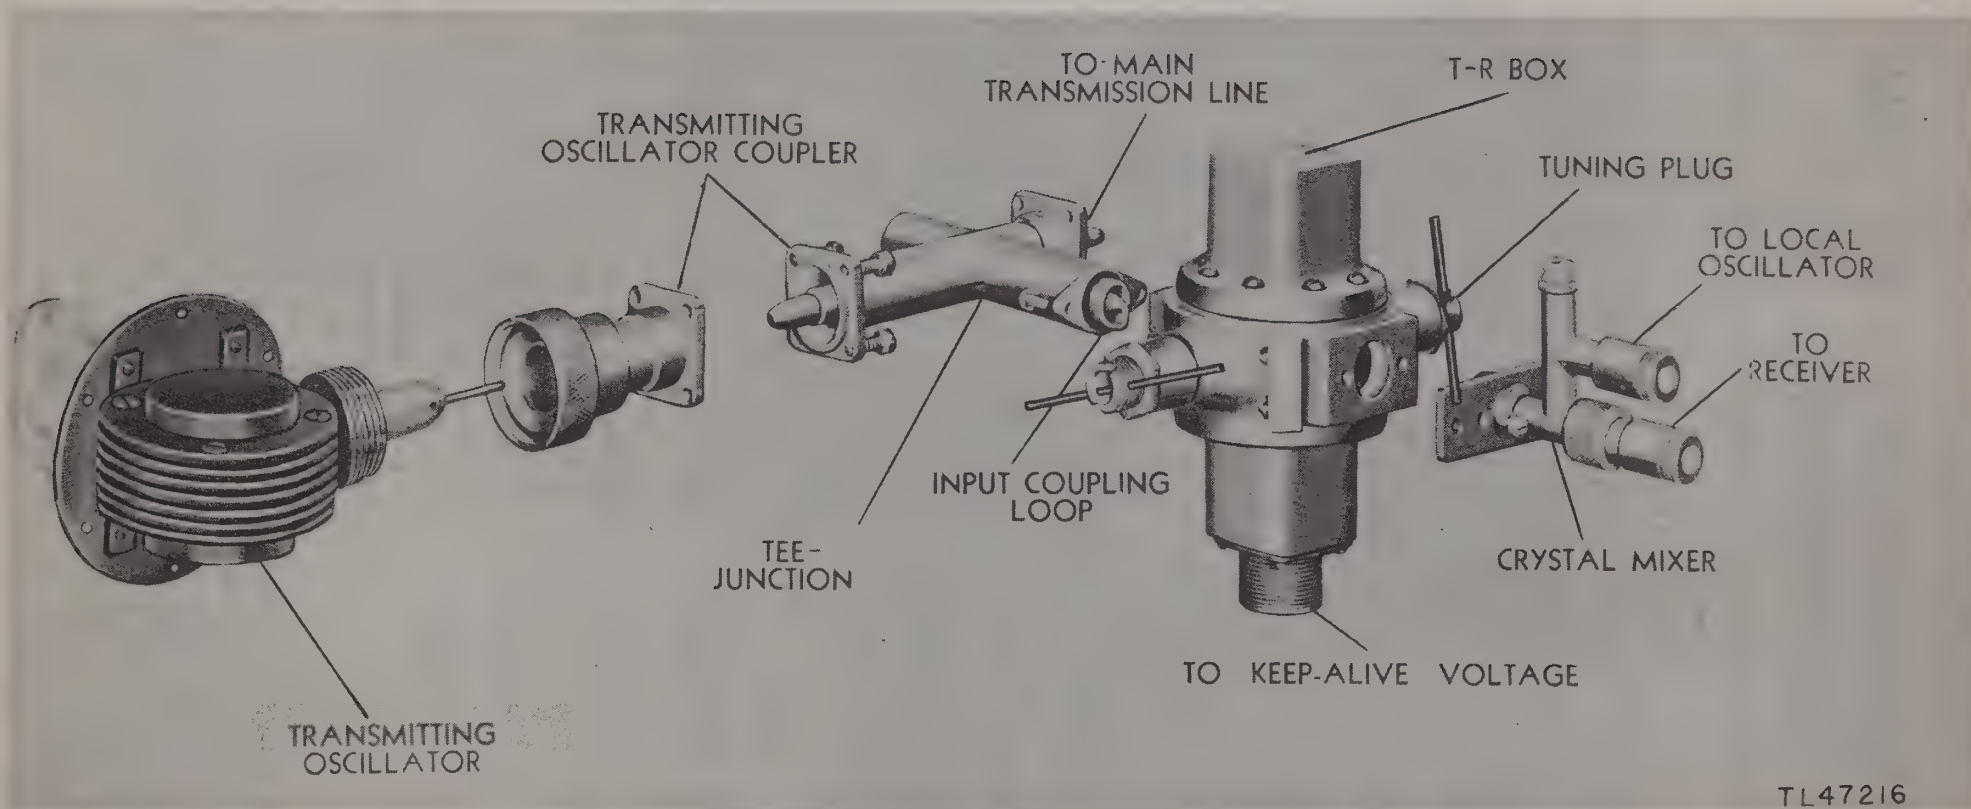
Transmitting oscillator, coupler, T-R box, and crystal mixer, disassembled.
